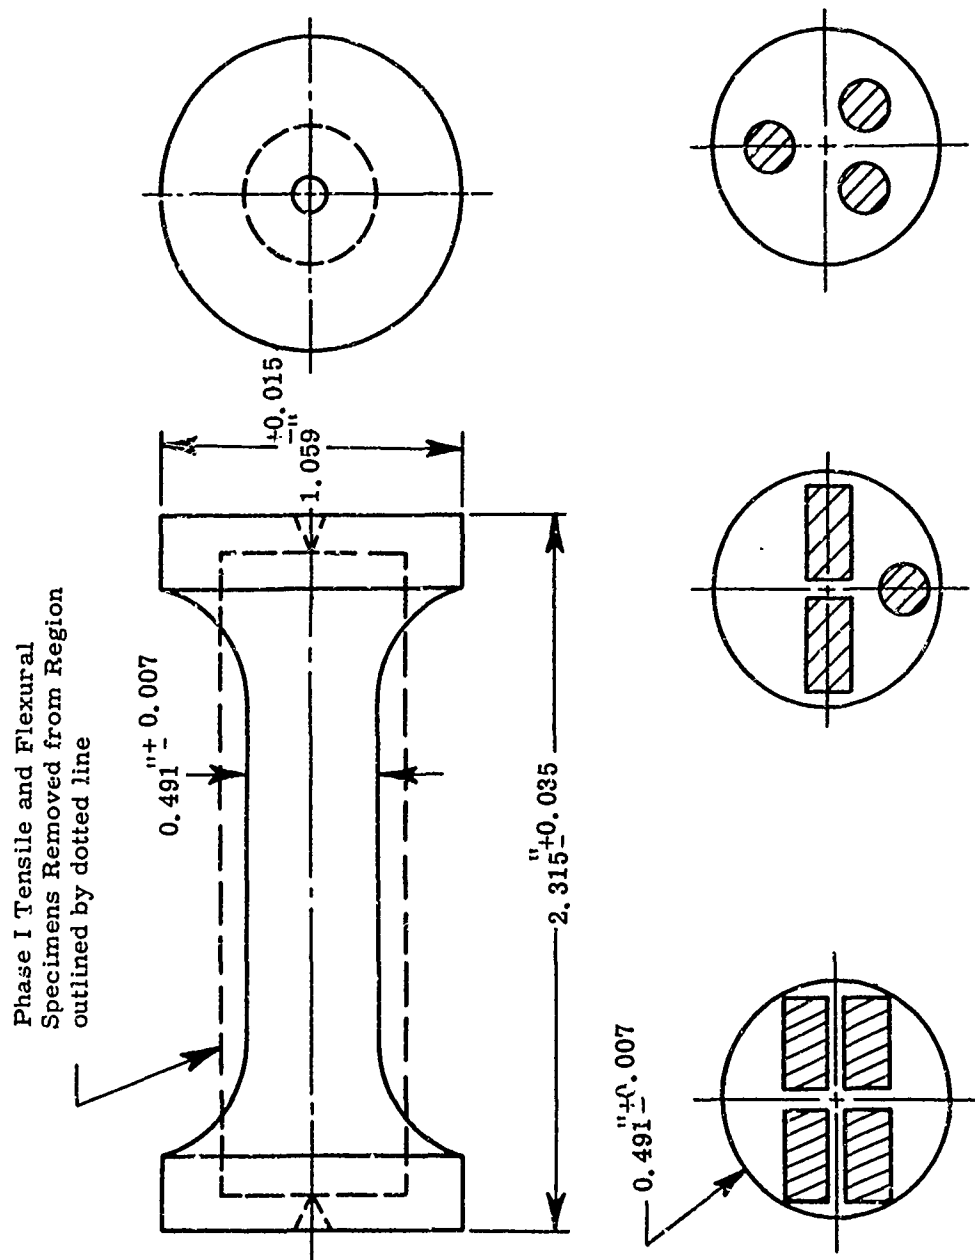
Configuration of Specimen Blank 1831-A-7 as received from Coors and Cutting Plan for Removing Phase I Macro Tensile and Macro Flexural Specimens
